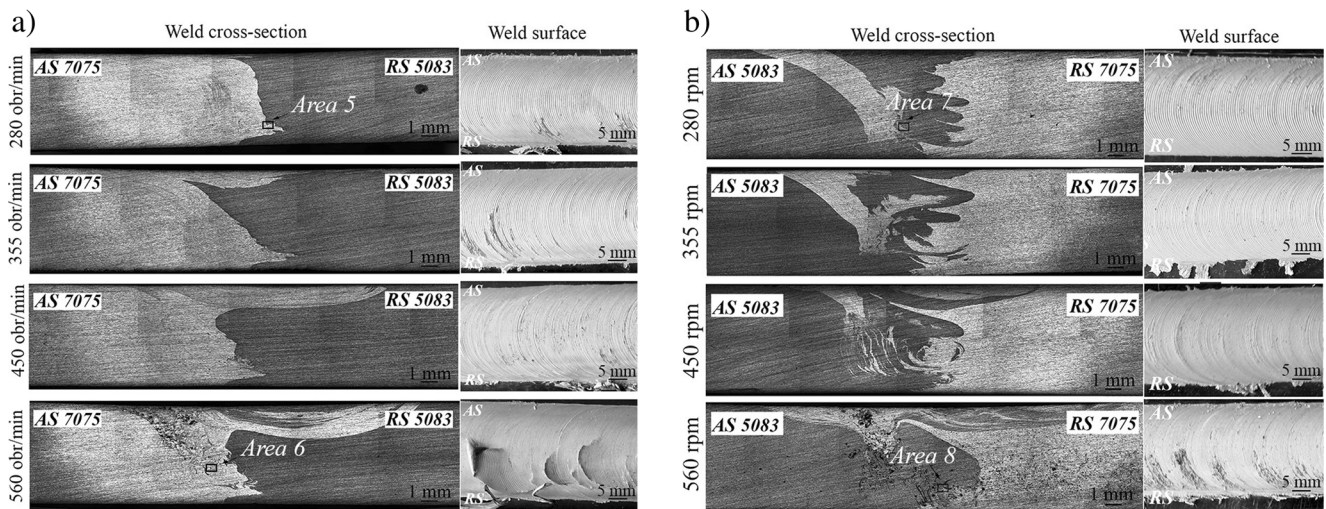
Macrographic view of the cross-section and top surface of a AS 7075–RS 5083 welds and b AS 5083–RS 7075 welds, with marked areas of microstructural analysis; threaded taper pin
